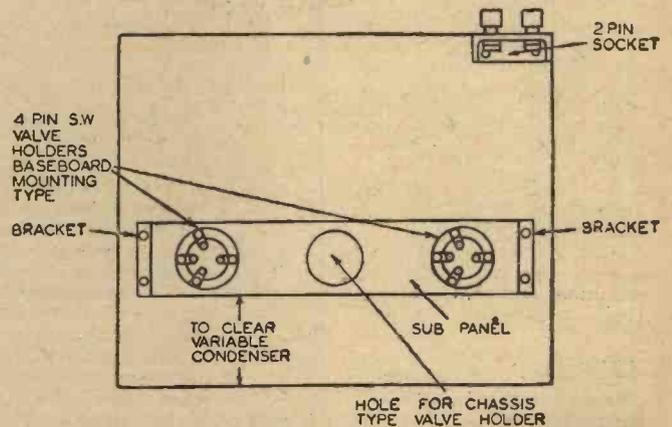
Showing the approximate position of the coil and valve platform. The two-pin socket and terminal strip is for H.T. supply.
